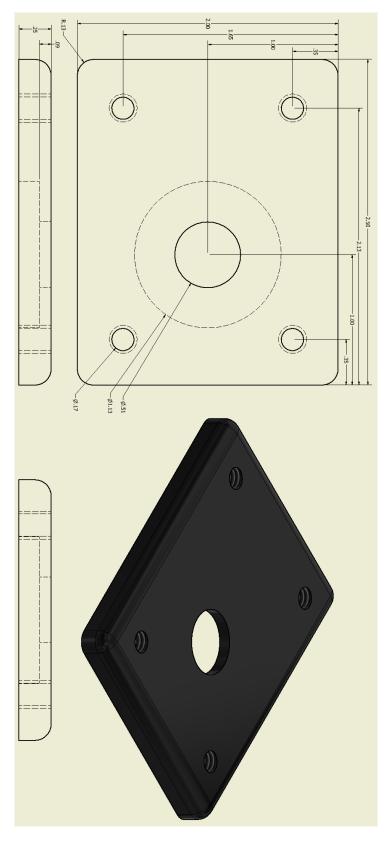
Arm Segment 1 Upper Half Bearing Cover Mechanical Drawing (Units: in)
